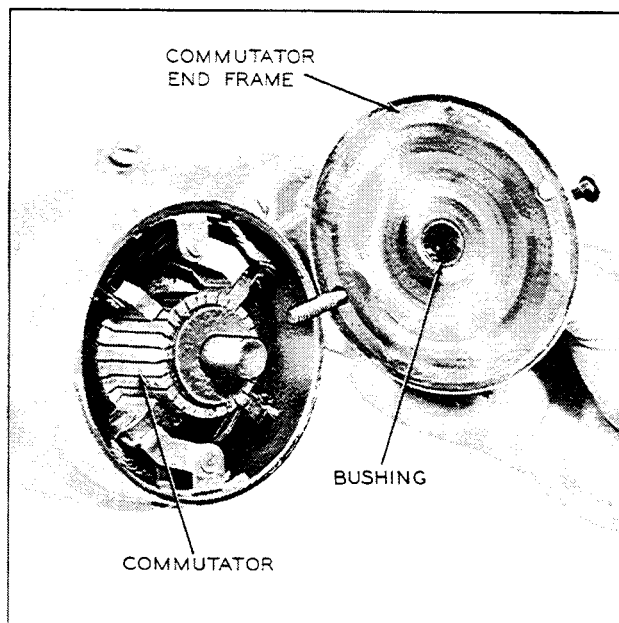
End Frame Bushing Lubrication-Typical Starter
